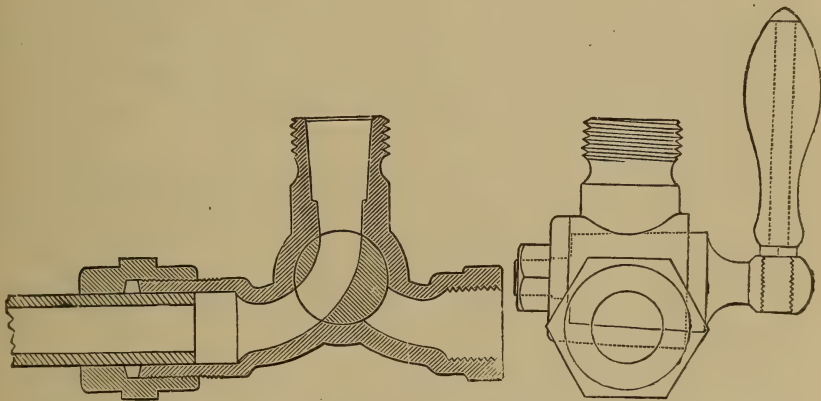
SECTION OF CROSBY THREE-WAY COCK.
